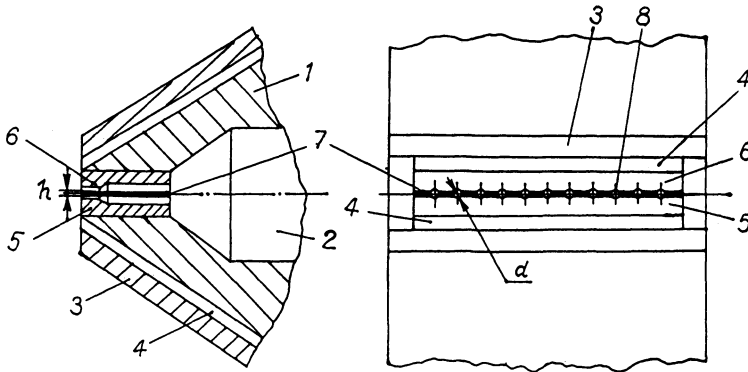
Extrusion spraying head [22]: 1 - body, 2 - cavity, 3 - cover plates, 4 - gap, 5 and 6 are copper and aluminum parts of die, 7 - dielectric layings, 8 - die holes.
